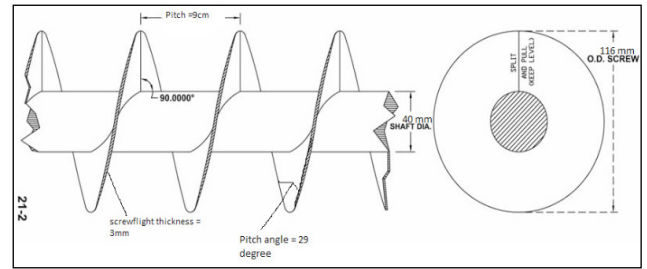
Single threaded screw conveyor mechanism for vermicompost delivery
